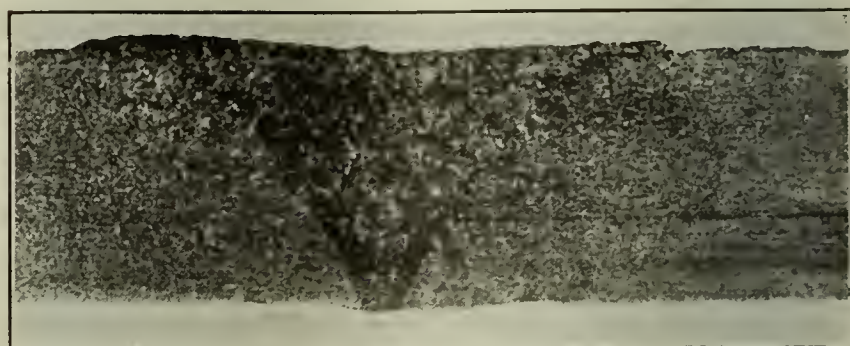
WELD MADE IN MILD STEEL, ETCHED WITH
